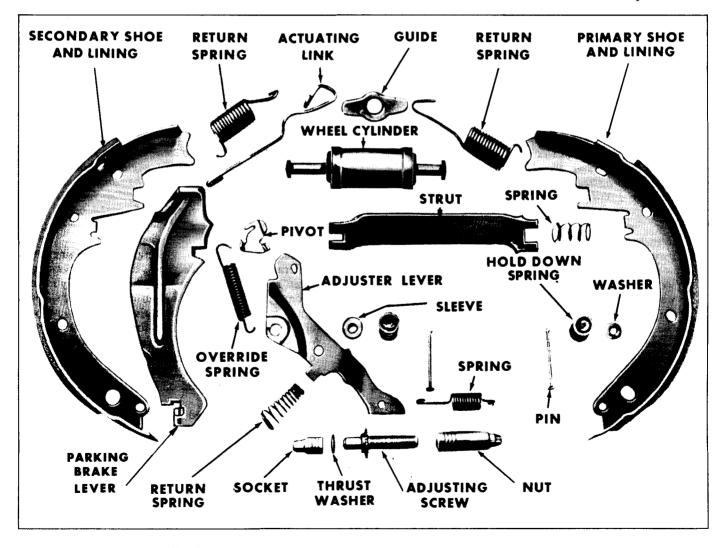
Exploded View - Typical Right Rear Self-Adjusting Brake Assembly
